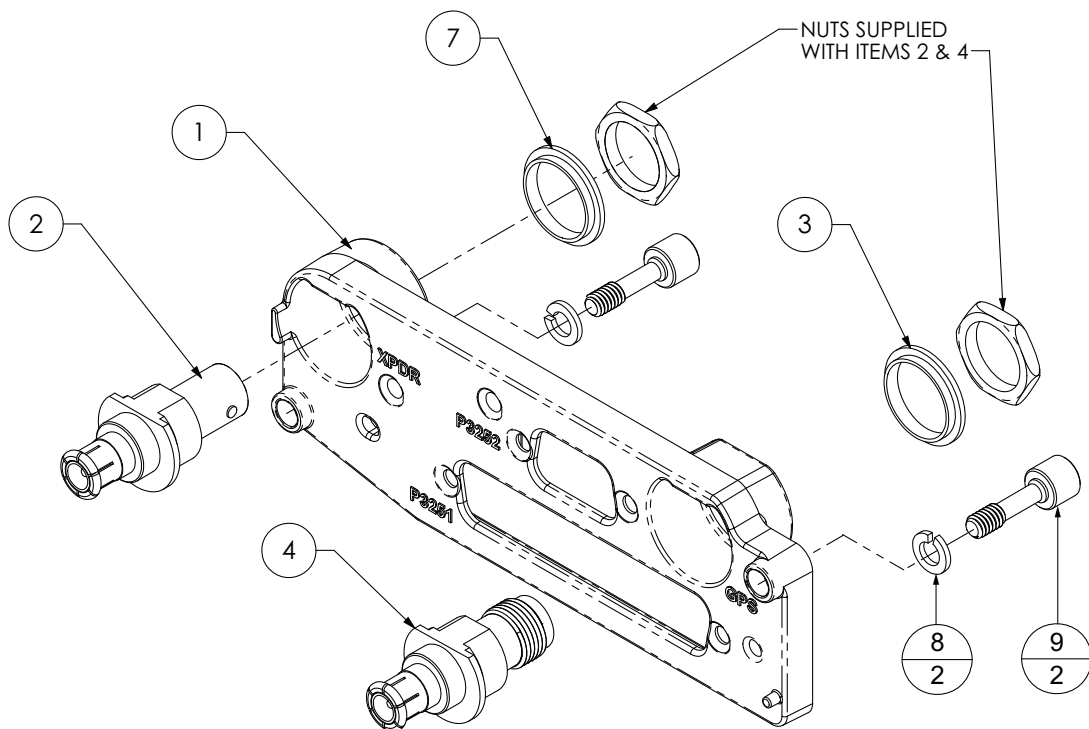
GTX 3X5 Vertical Mount with GPS, Back Plate Assembly (P/N 011-02976-11)
